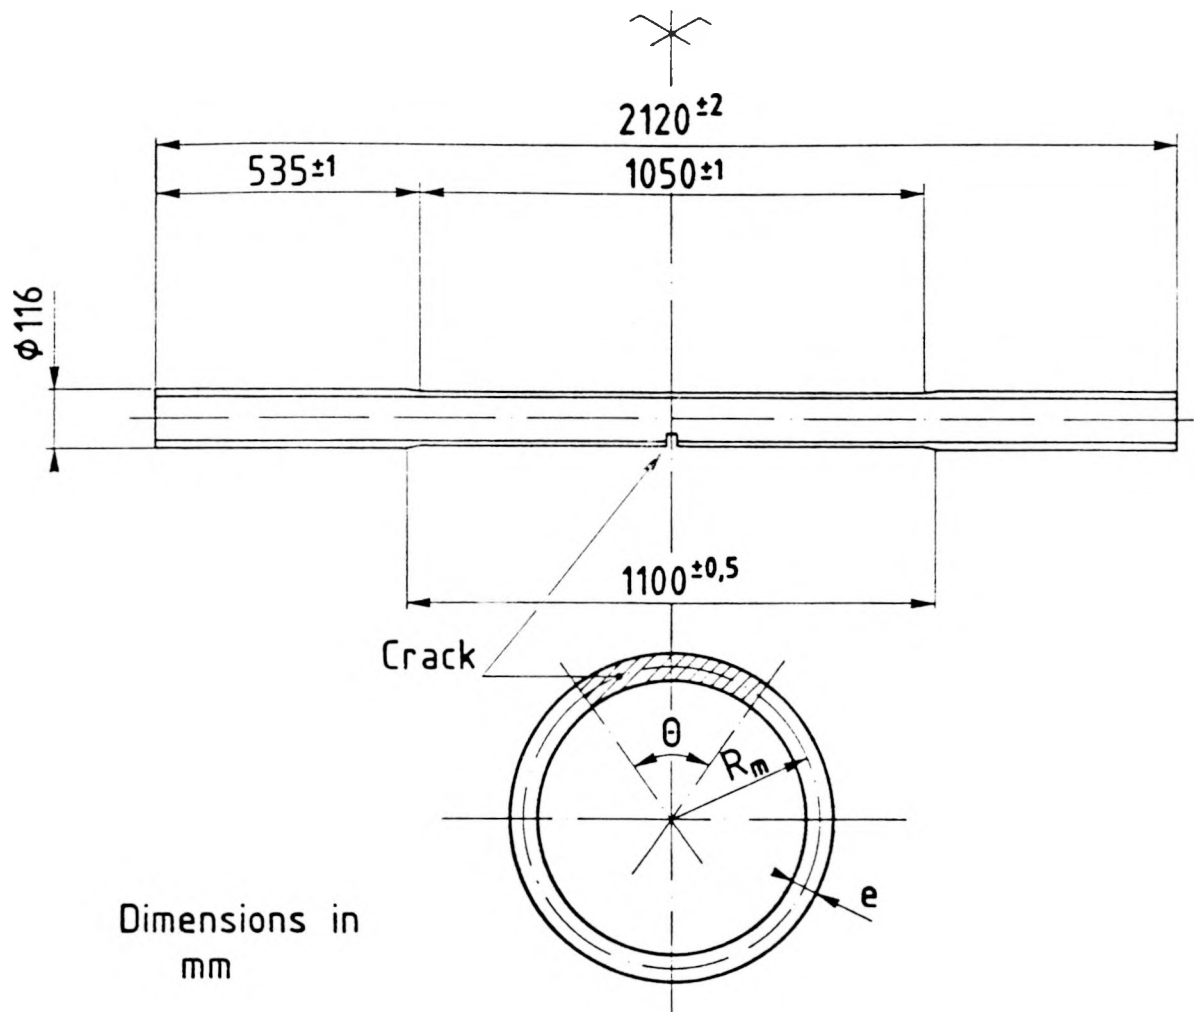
EXPERIMENTAL TEST DEVICE FOR STRAIGHT PIPES
